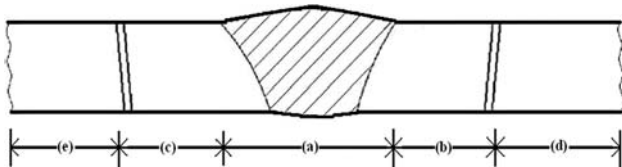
Microhardness values in different zones of weld joint as taken on reference specimen, i.e. without cracks, are (a) weld zone 345–355 HV, (b) HAZ 357–367 HV, (c) HAZ on opposite side of weld bead 353–367 HV, (d) base metal 346–357 HV and (e) base metal on opposite side of weld bead 347–358 HV
